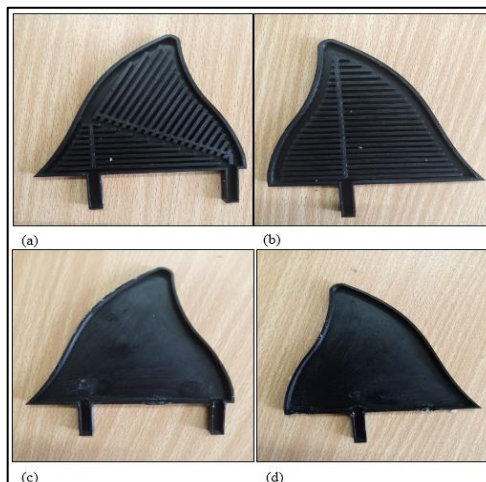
(a) Printed right lower Mold. (b) Printed right upper Mold. (c) Printed right upper base
